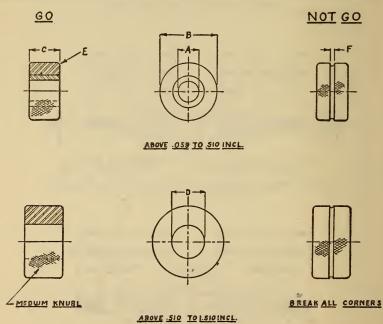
Plain ring gages, above 0.059 to 1.510 inches, inclusive
